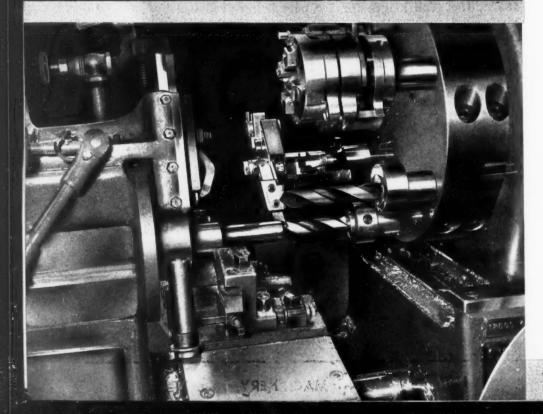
Automatic Lathe Set up for Machining Operating Strut Cylinders for Hydraulic Landing Gear Typifies the Application of Multiple Tooling in an Airplane Factory Machine Shop
